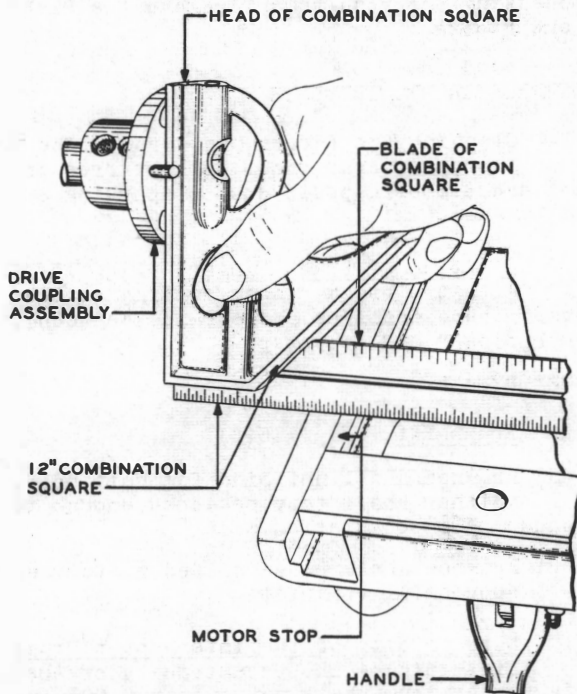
Method of Checking Horizontal Distance Between Coupling Assembly and Motor Stop
